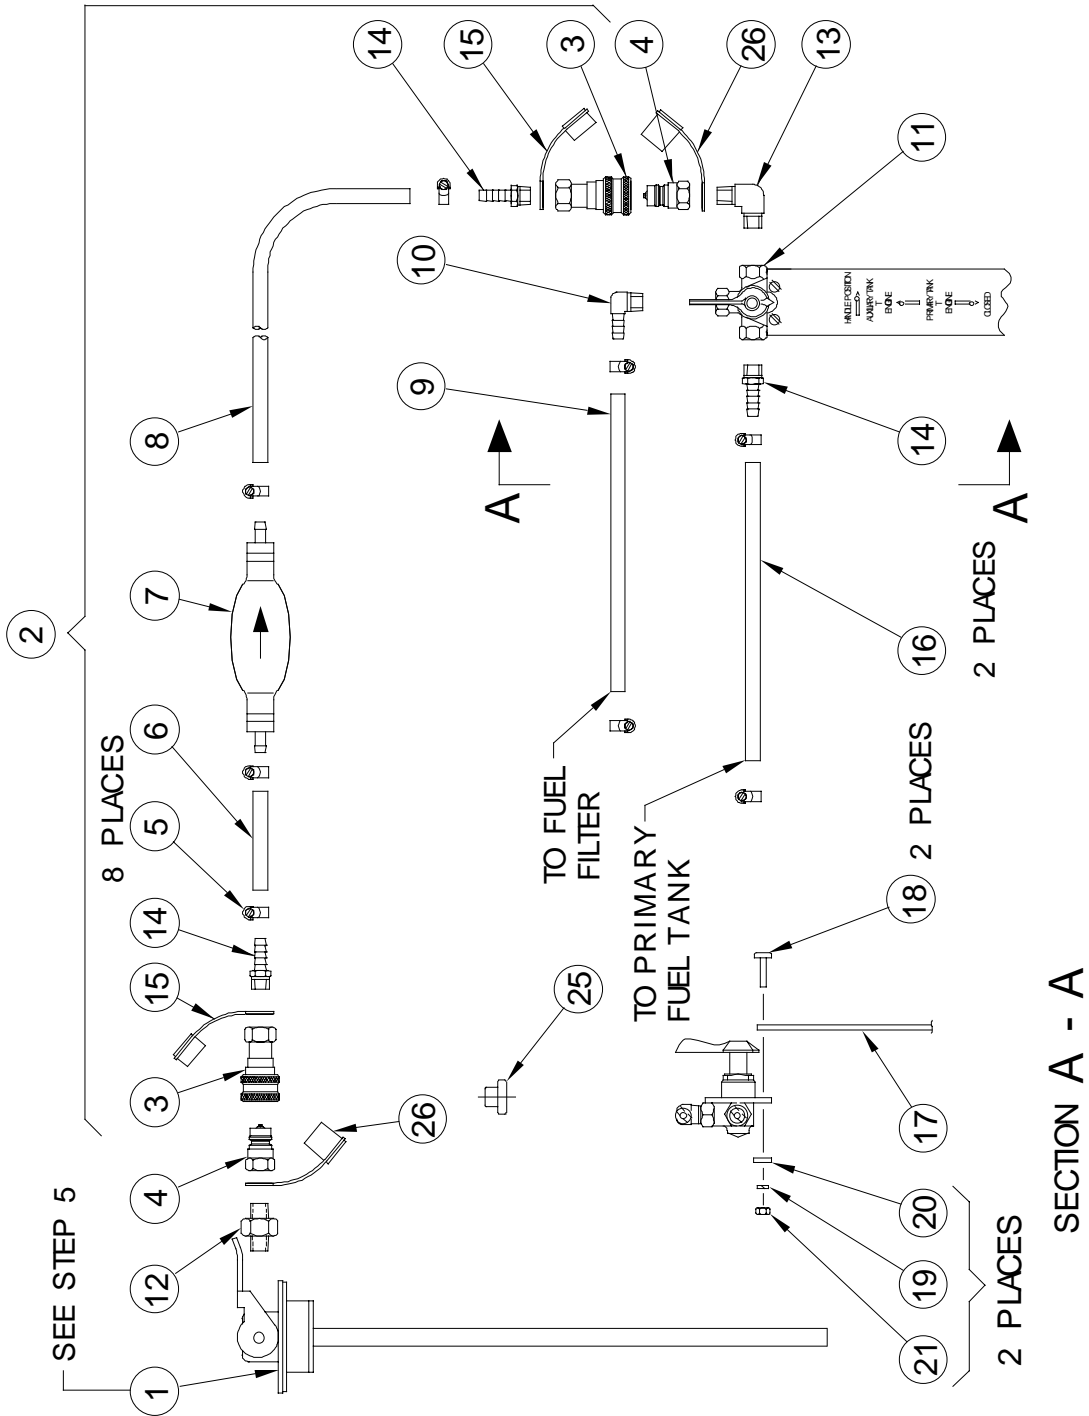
Auxiliary Fuel System (Sheet 1 of 2)
